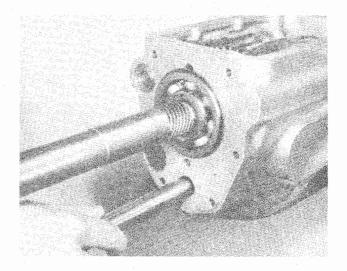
Inserting Churchill Tool No 20S. 77 preparatory to driving out needle roller retaining tube.
